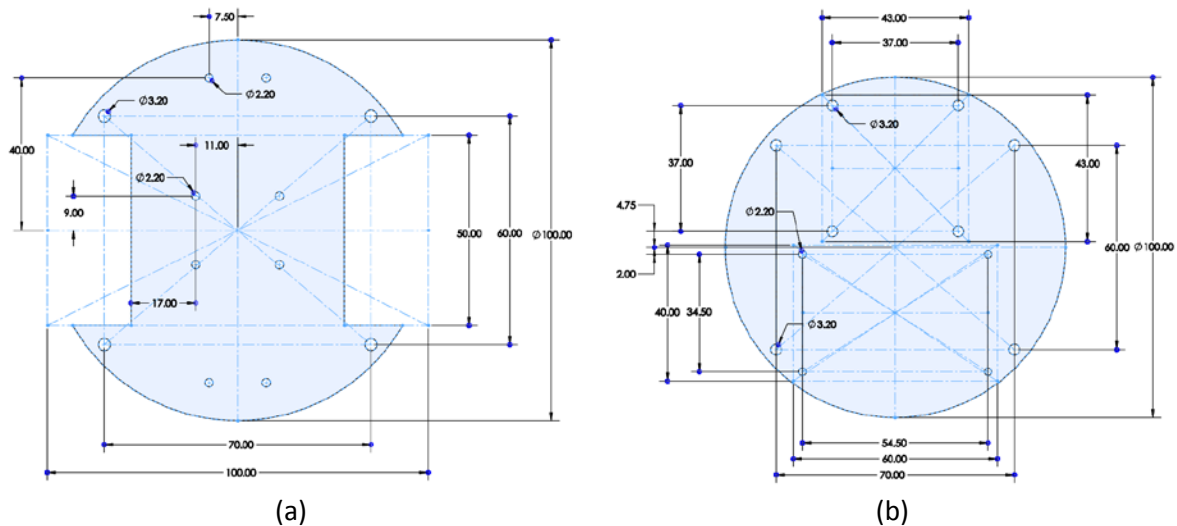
MiniDRIVE - Chassis Design (a) Upper Chassis Plate and (b) Lower Chassis Plate
